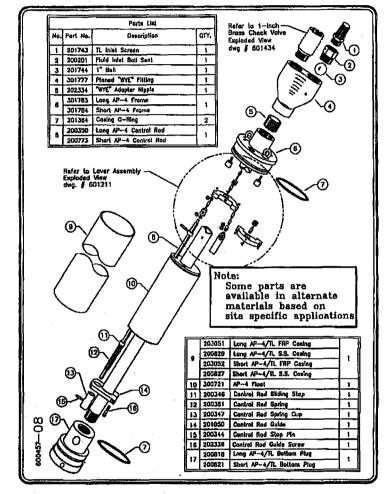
Exploded View of a Top-Loading AutoPump AP-4 (Long & Short)
